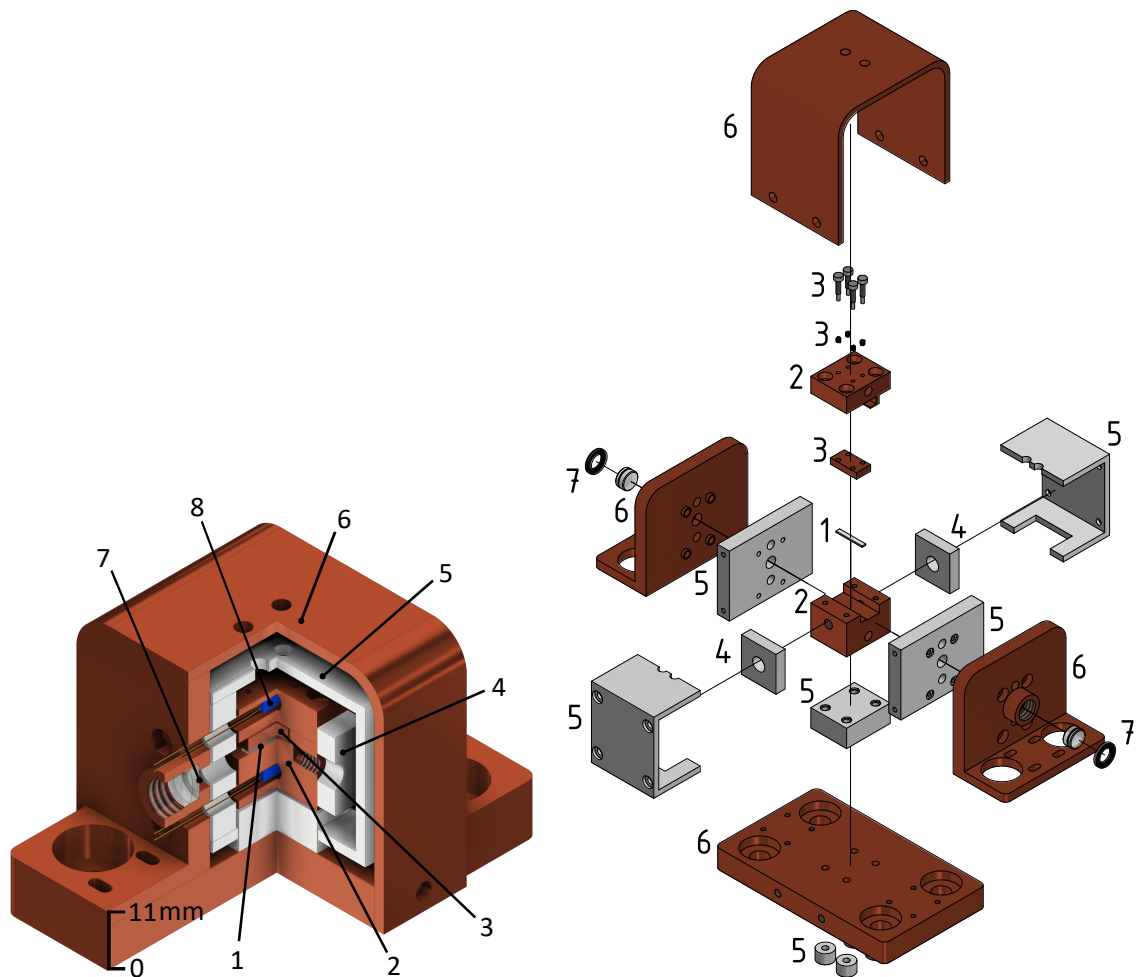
3D drawing of the first crystal oven. Left: Cut-away drawing of the oven for the PPLN crystal. Right: Explosion drawing of the same oven. For both drawings: 1: waveguide, 2: parts of the socket, 3: fixation parts, 4: Peltier elements, 5: inner MACOR<sup>®</sup> shield, 6: outer copper shield, 7: lenses, 8: PT1000 temperature sensor.
